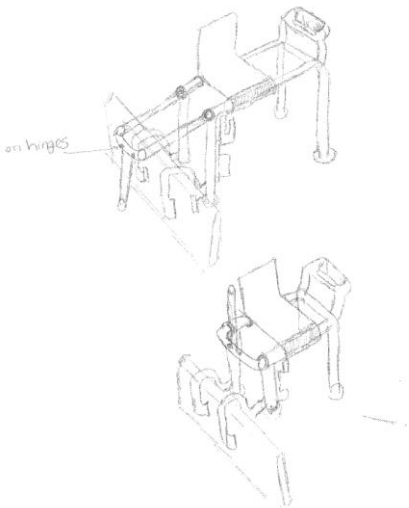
Design 8 Hydraulic Clamping Chair (extended and folded in)
